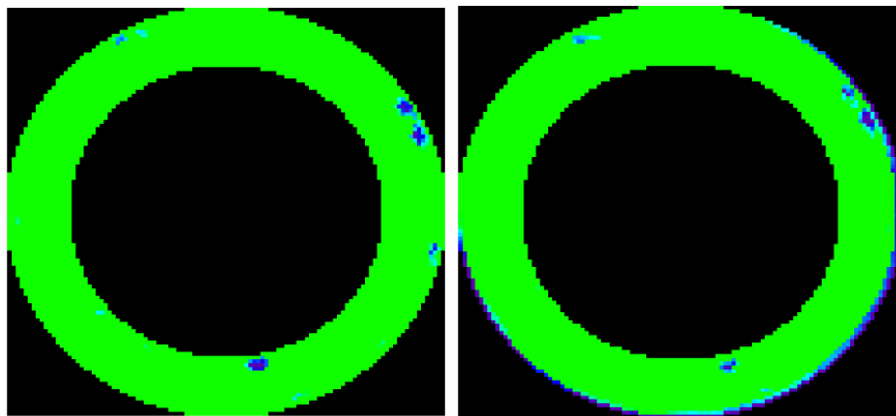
Ultrasonic scan of W-10 weld interface showing minor defects at inner/outer circumference before (left) and after (right) flash removal, defects are illustrated in blue
